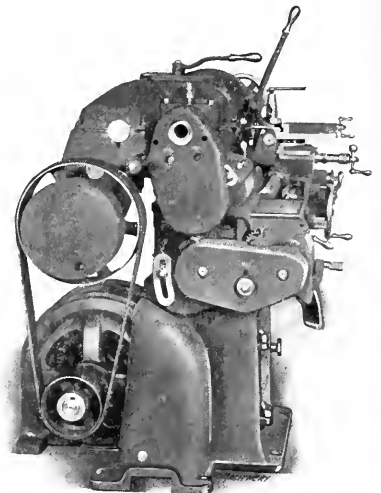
End View of Greaves-Klusman Lathe with Motor Drive
